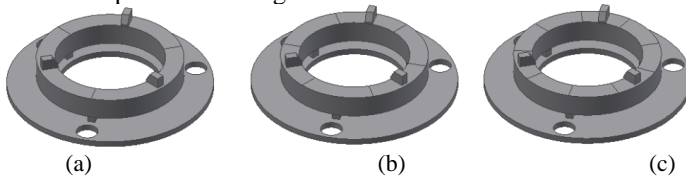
Mesh views of different flange configurations of piezoelectric actuators: (a) actuator with disk-shaped flange, (b) actuator with triangle-shaped flange
